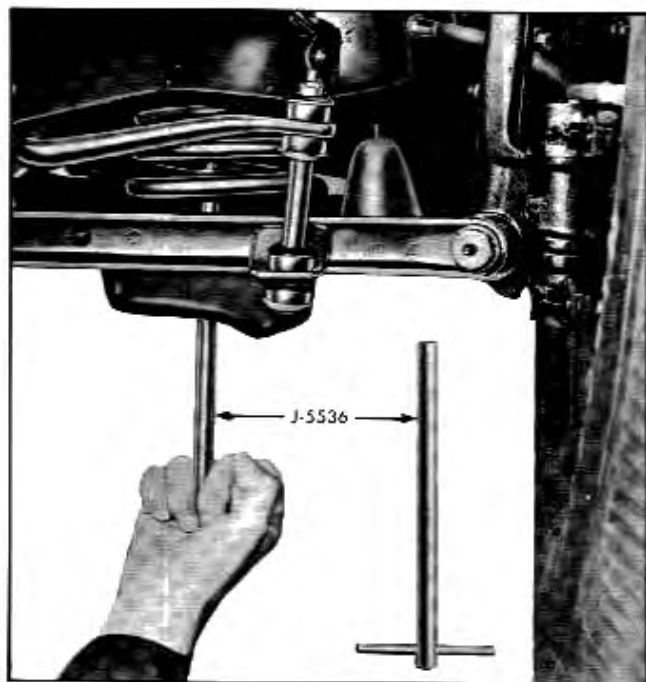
Compressing Shock Absorber With Tool J-5536
